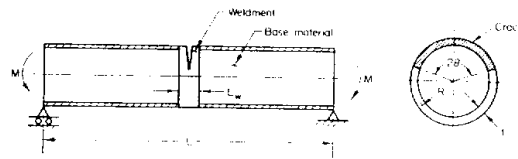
Schematics of pipe weldments with a circumferential flaw
